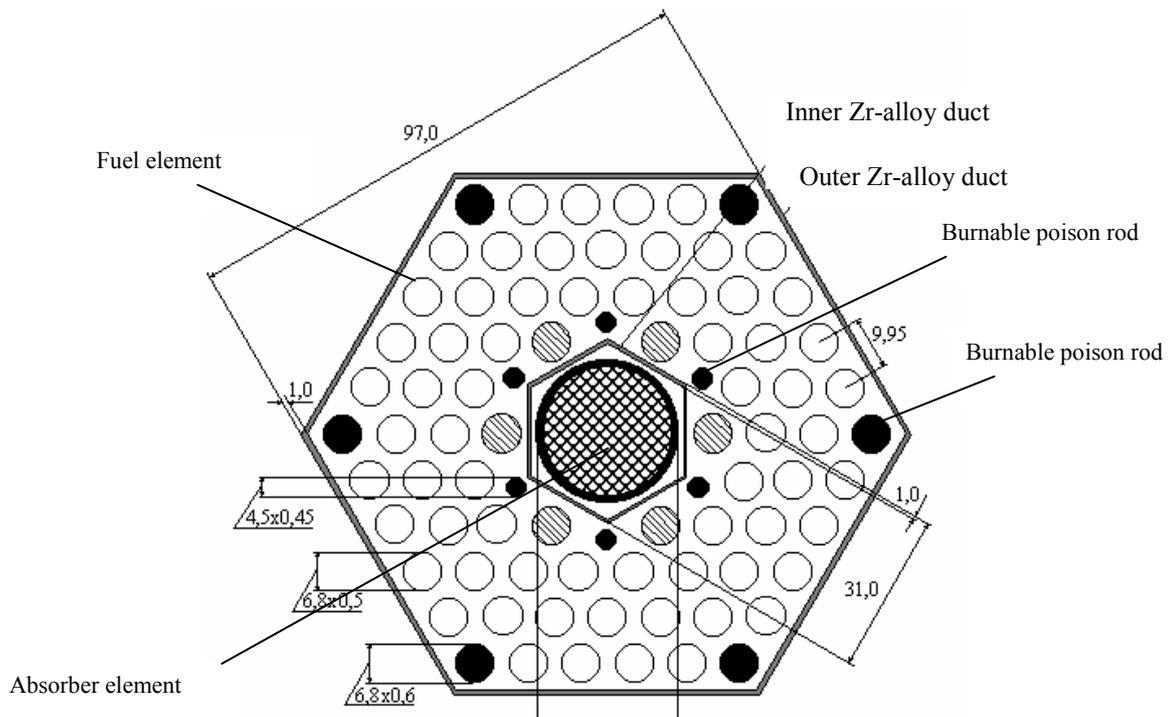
Cross-section of the KLT-20 fuel assembly.
